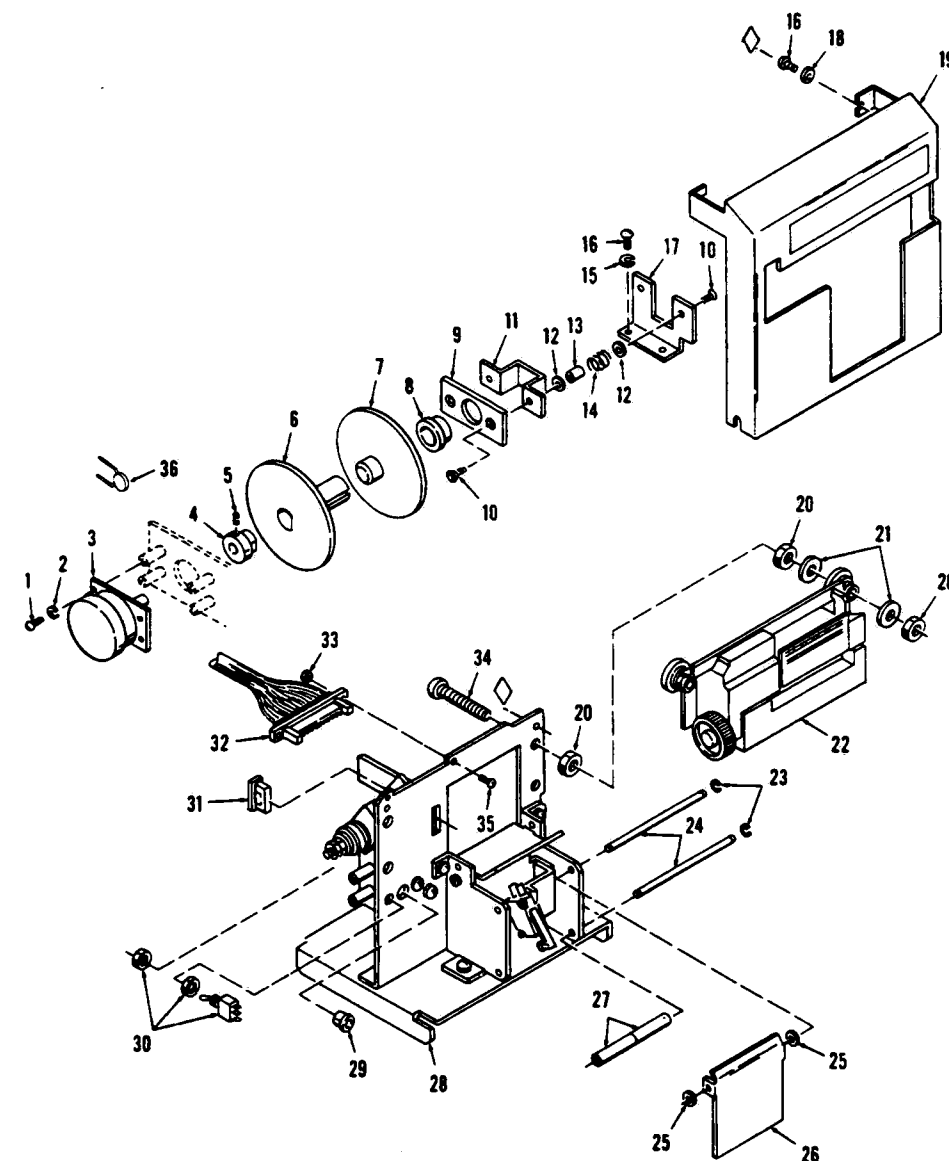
PRINTER FRAME ASSEMBLY (Part 1 of 2).
